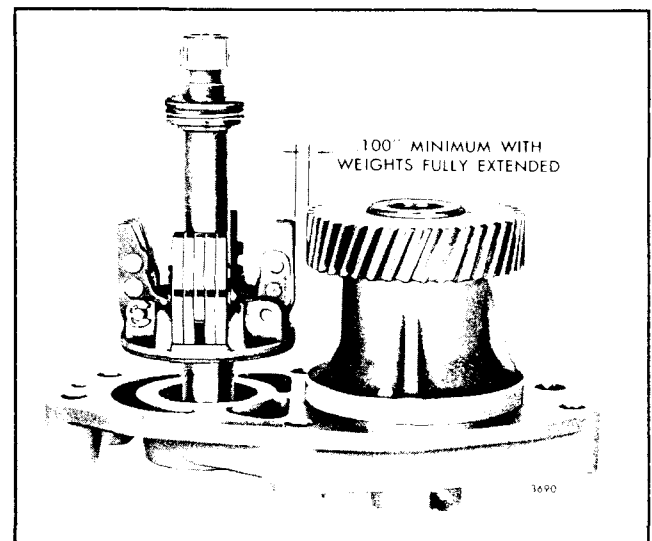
Minimum Clearance Between Blower Drive Gear and Governor Weights
